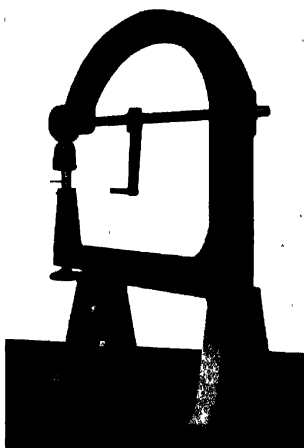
Wheeling machine for smoothing purposes. (Walter Frost.)
